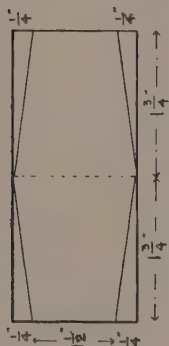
PLAN OF DOVETAIL TEMPLATE.
